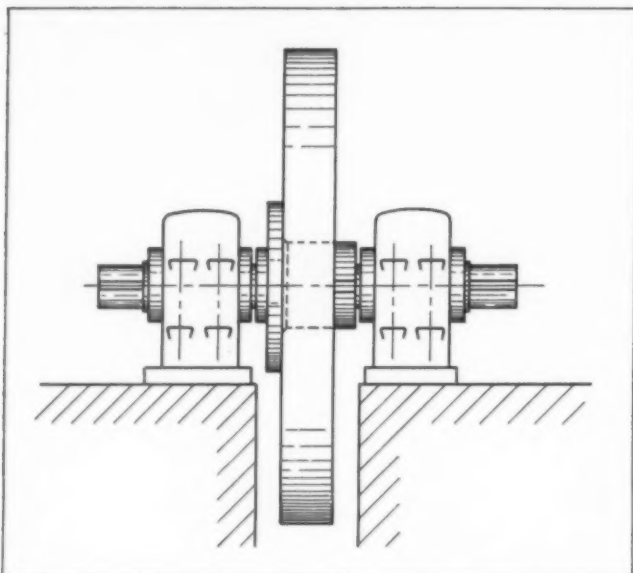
Above—Typical low-speed shaft flywheel mounting
